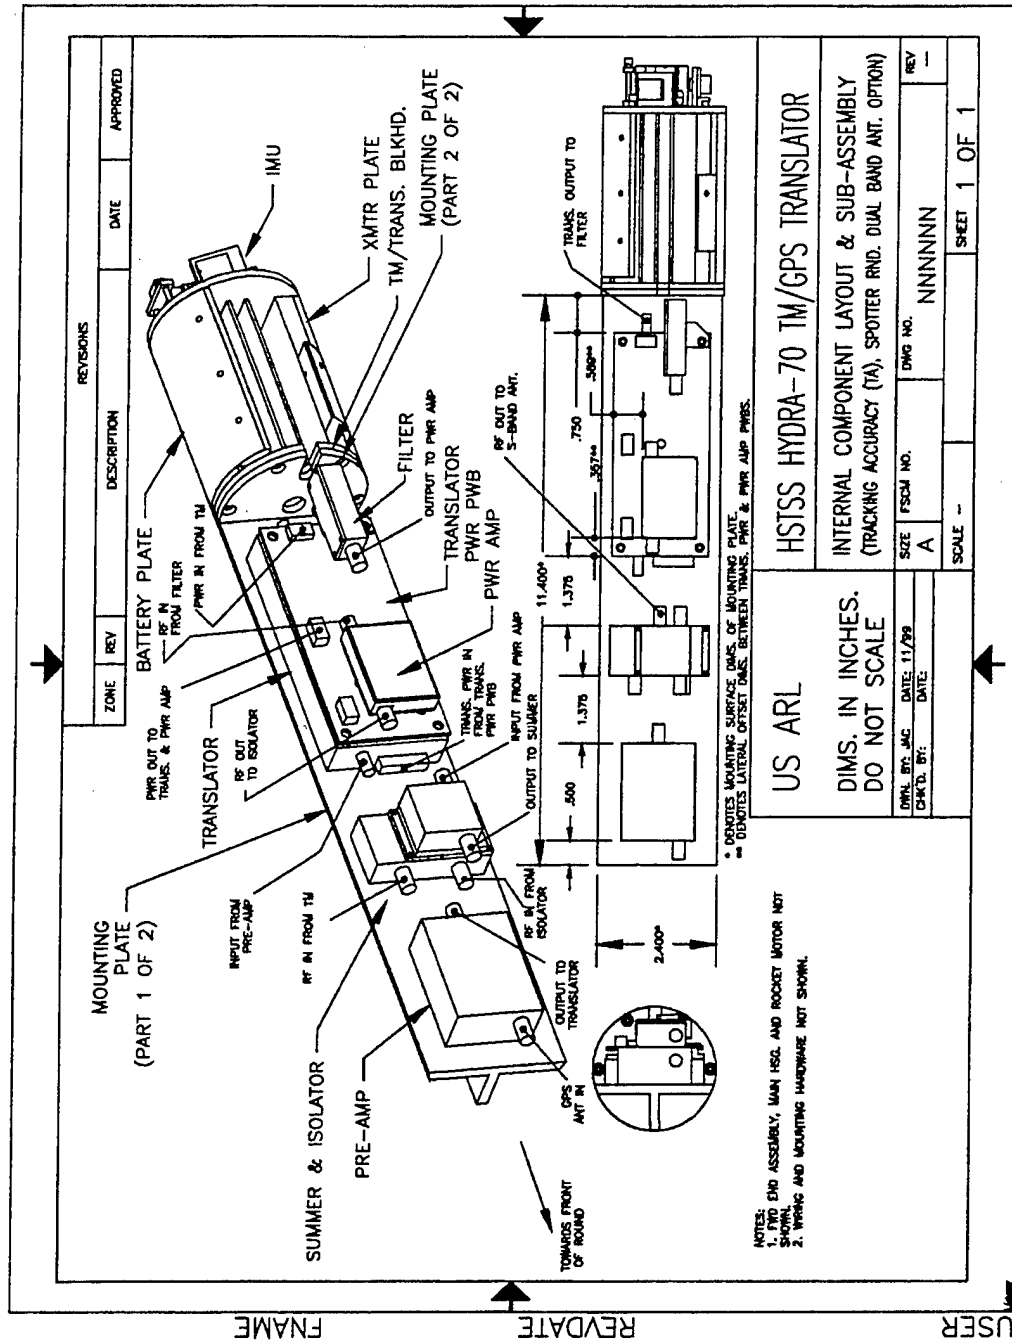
Main Housing Internal Components Sub-assembly Drawing.
